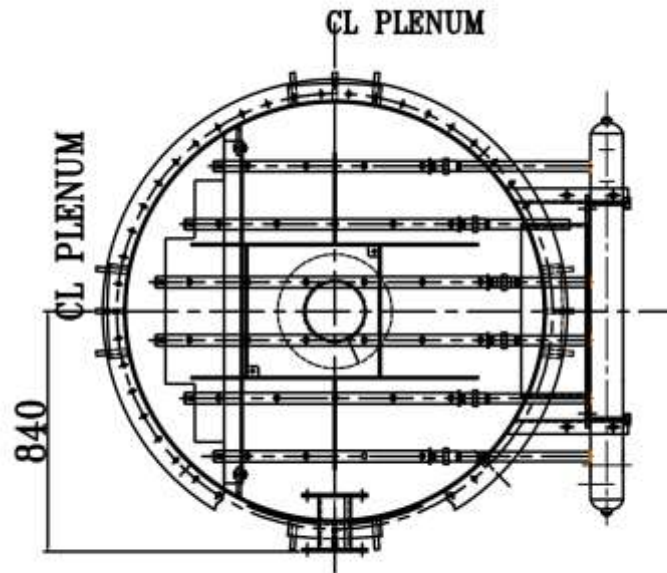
Plan of the bag filter assembly used in vacuum test rig
